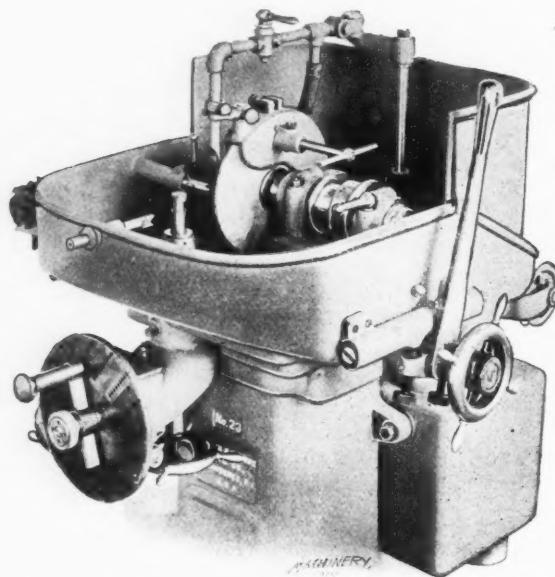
Details of the Wheel Feed and Work-holding Arrangements.
